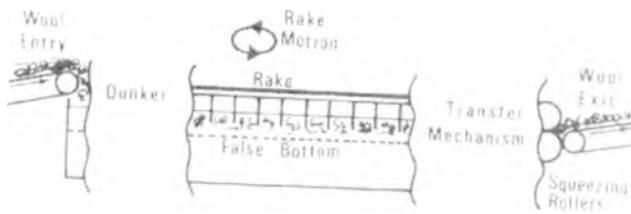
Scouring of raw wool in traditional scouring machines.
